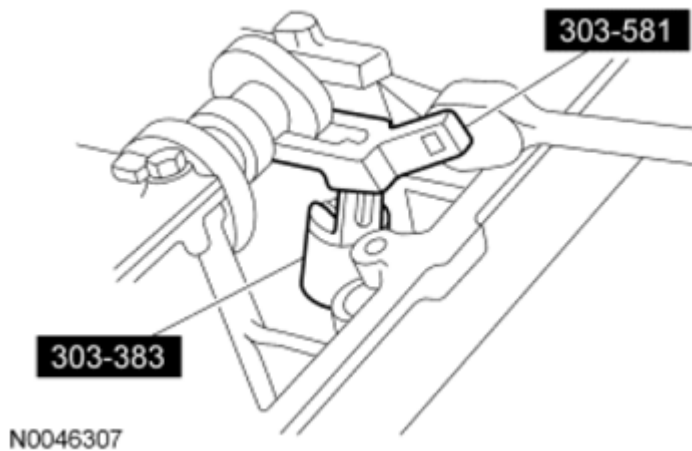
Installing Valve Stem Seals Using Valve Spring Compressor And Valve Stem Oil Seal Installer
